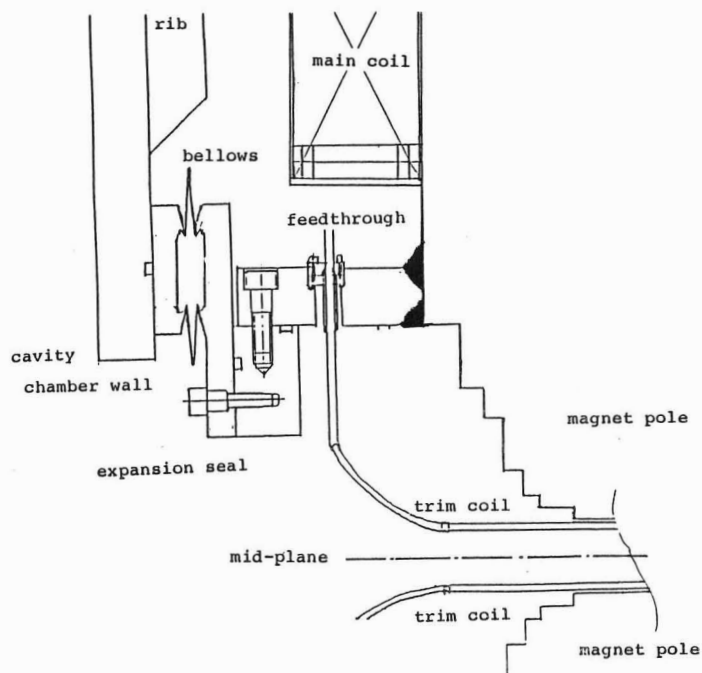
Cross-sectional view of the pneumatic expansion seal between the magnet and RF cavity chambers.
